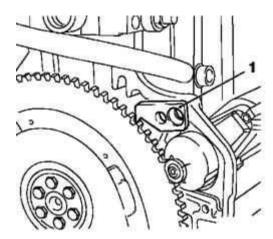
Lock the flywheel during installation: 1 - a special device
